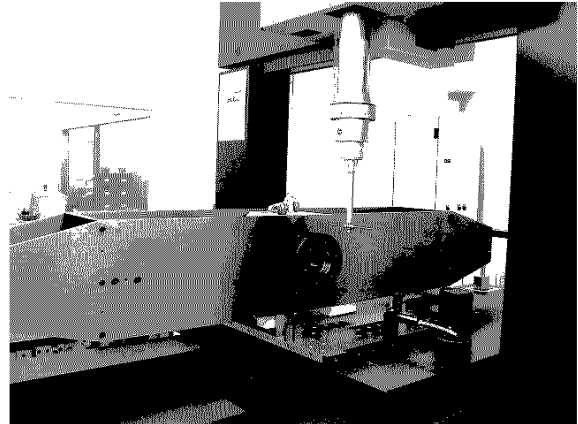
Length measurement of the torque arm using three dimensional coordinate measuring machine
